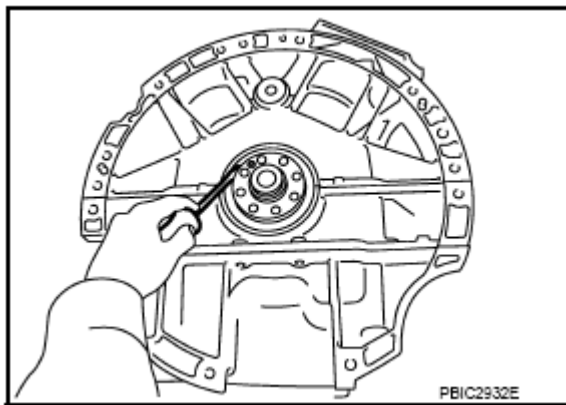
Removing Rear Oil Seal With Suitable Tool
